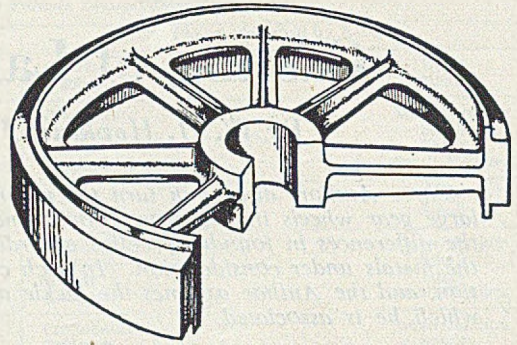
ISOMETRIC VIEW OF GEAR WHEEL, DIAMETER 8 FT. 2 IN., SHOWN IN FIG. 1 (TOP).
